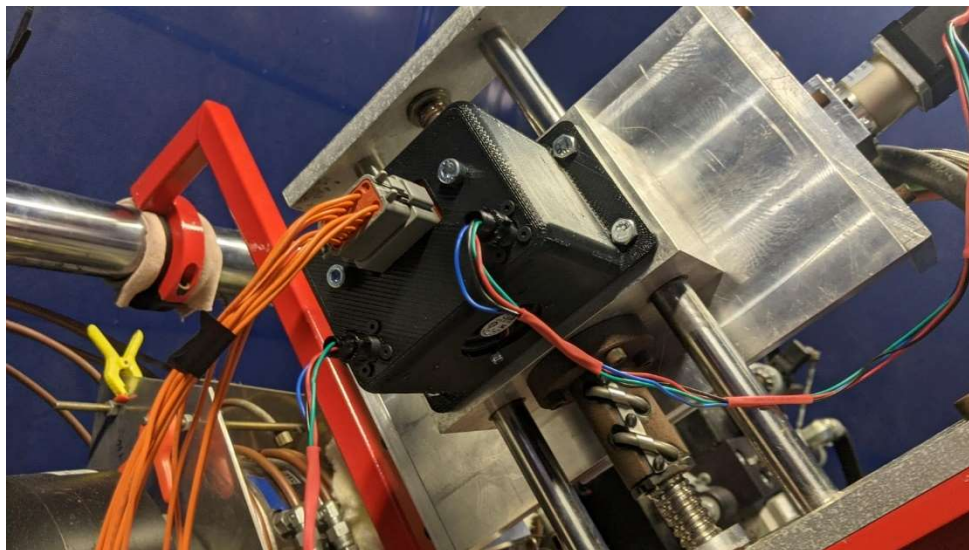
Assembled breakout box mounted on the positioner with the two motors connected
